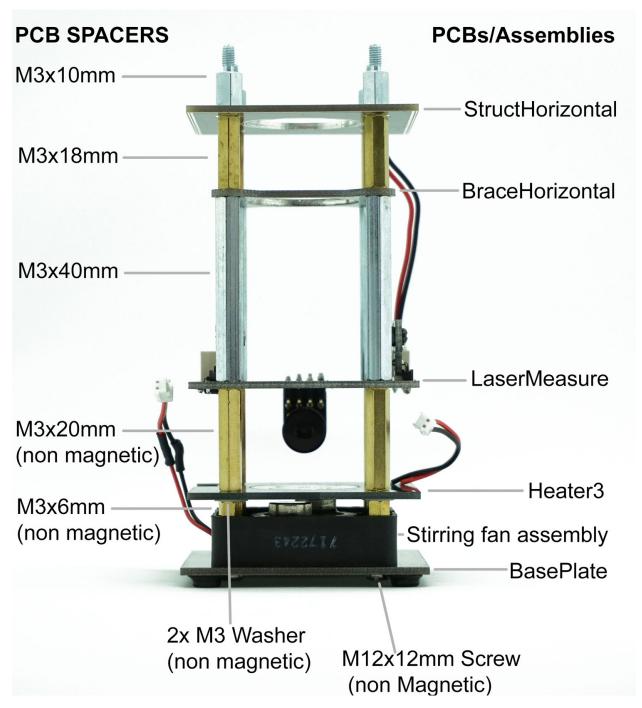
Internal structure, illustrating each spacer/screw (left) and PCB (right). Non magnetic PCB spacers/washers are required at the bottom of the device as too much magnetic material in this area can stall the stirring motor.
